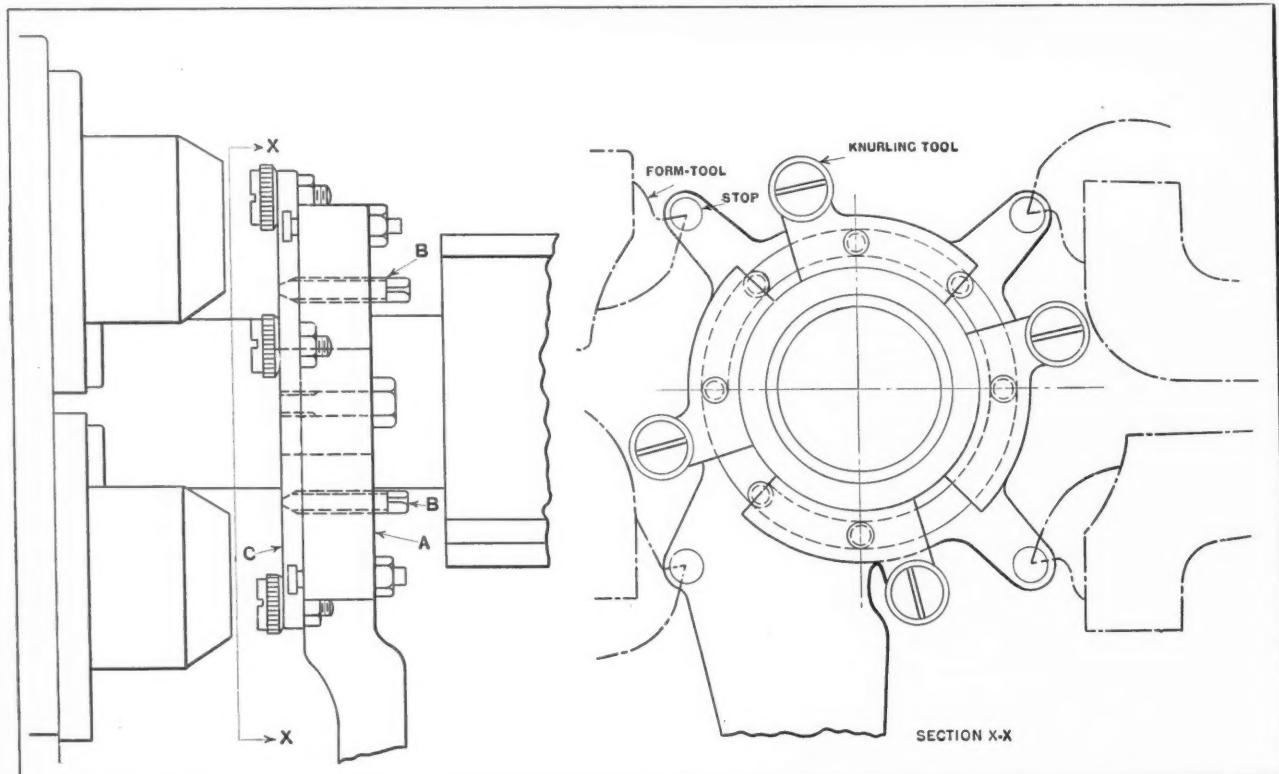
Cam-oscillated Ring which Carries the Stops and Knurls
